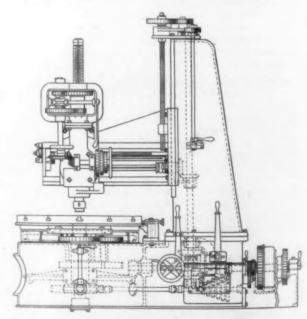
A Side Elevation of the Device Employed to Feed the Drill Head and Move the Work Support to Give Odd Shapes of Holes, Etc., Partly Broken Away
